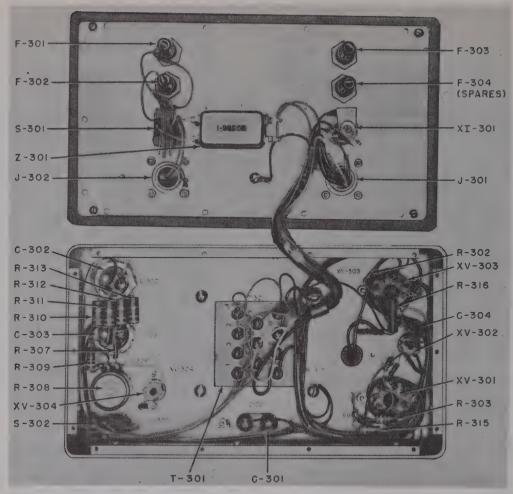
Power Supply PP-530A/URM-17, Chassis Bottom View
